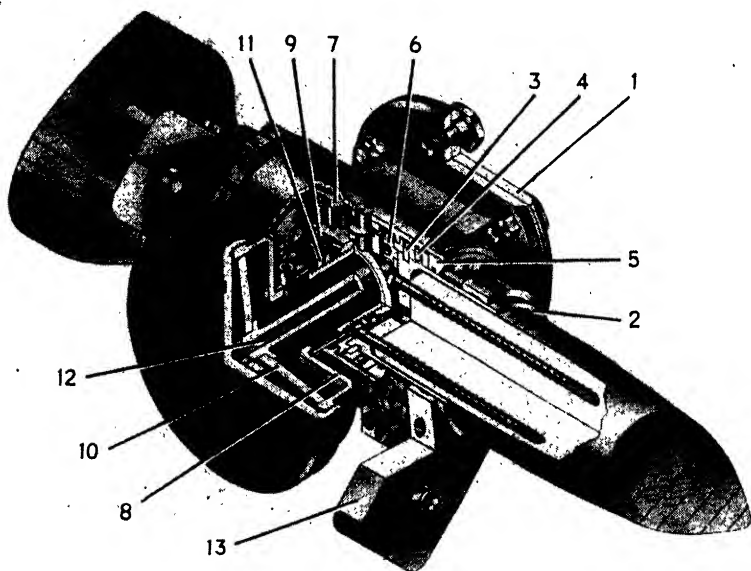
Hub of "Skyblade" propeller. (*Sensenich Brothers.*)
